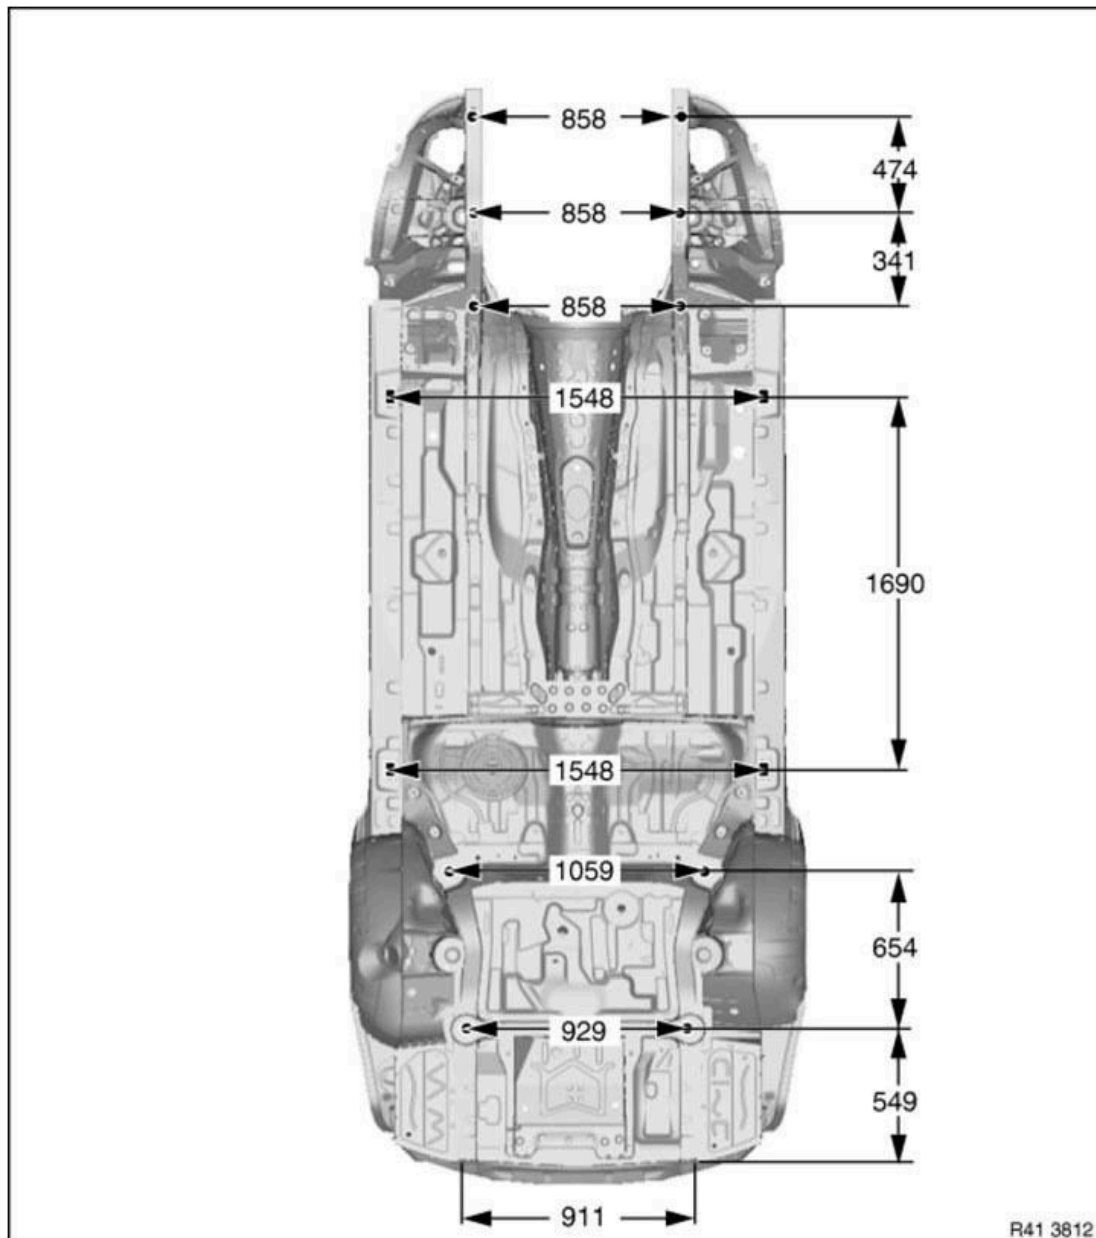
Identifying Frame Alignment Control Dimensions (Underbody View 1)
